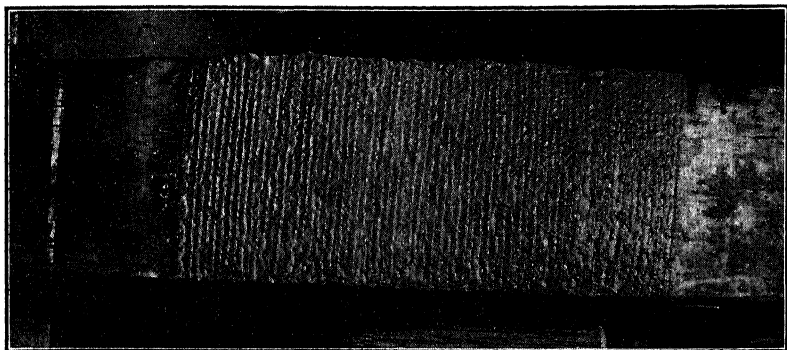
Worn locomotive buffer casting after being built up by shielded arc welding.
